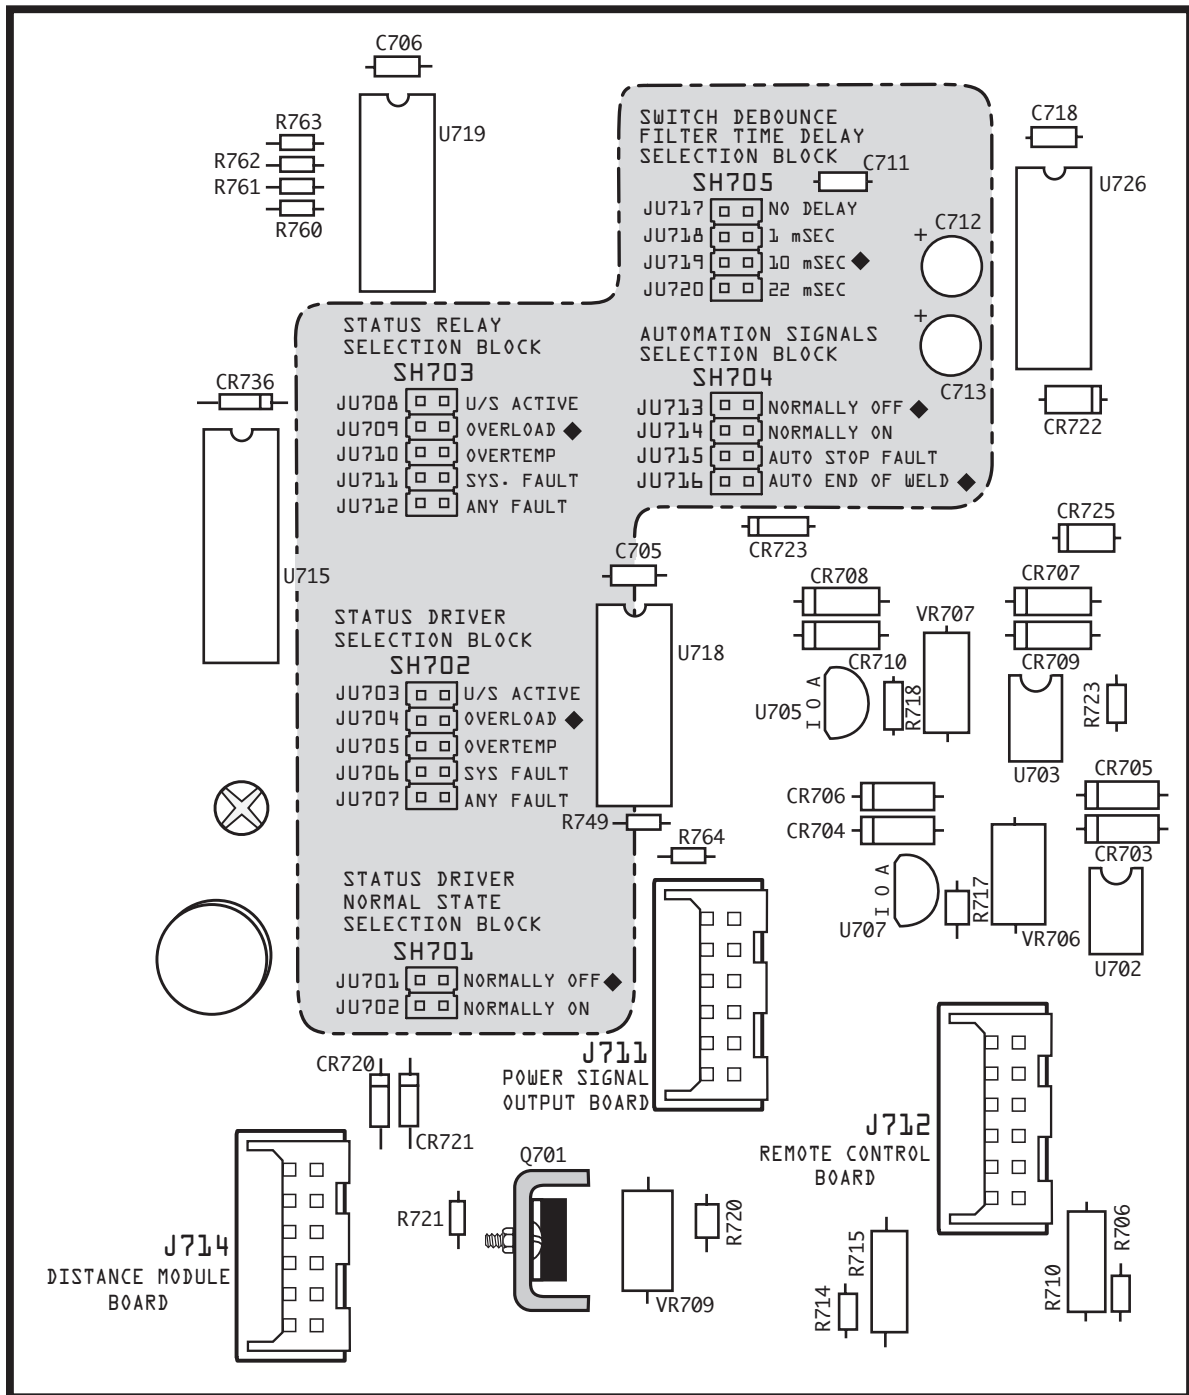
Rev-0 Motherboard Jumper Block Detail
